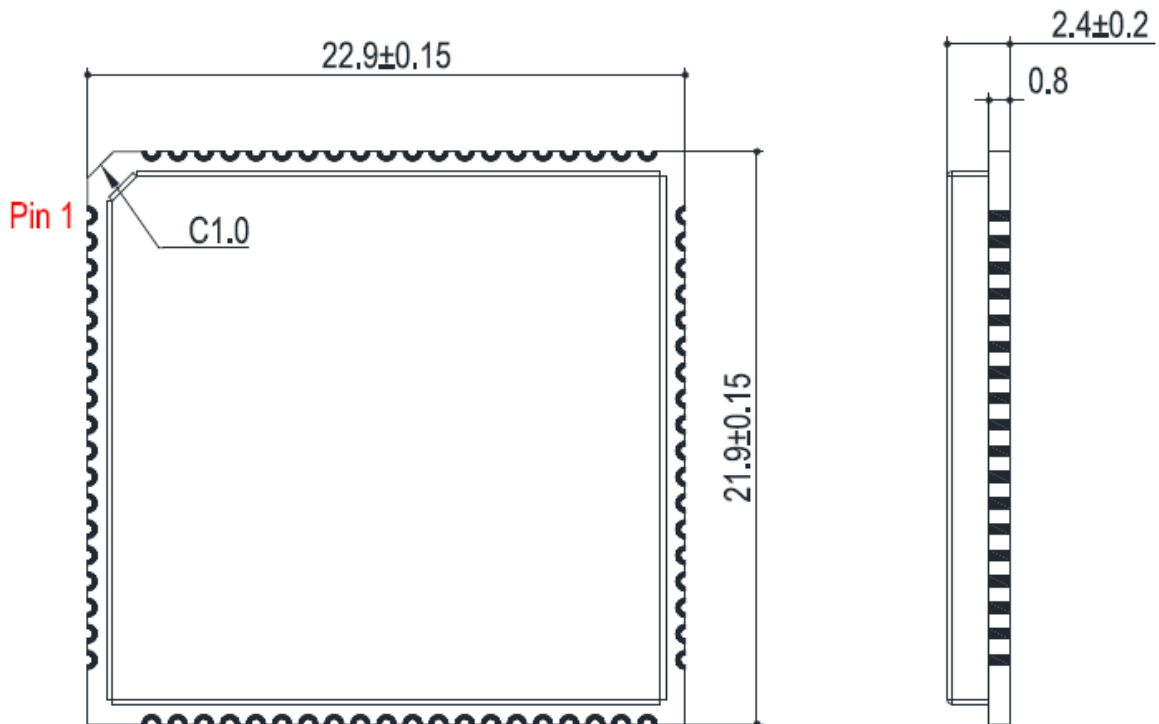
EC600M Series Module Top and Side Dimensions (Unit: mm)
